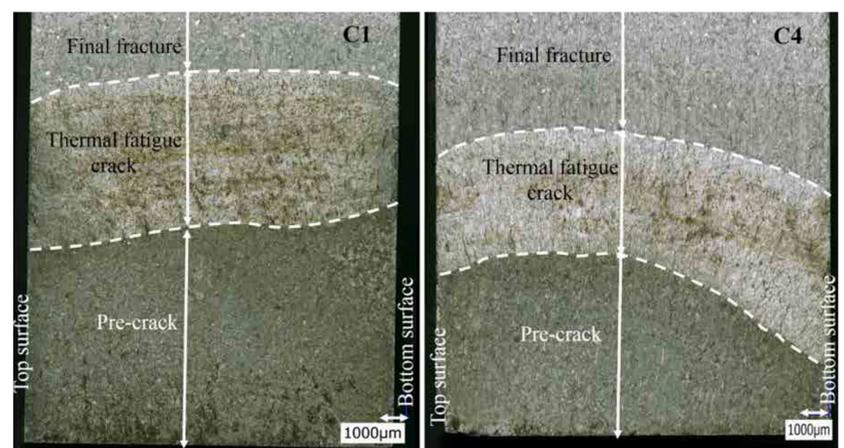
Illustration of fracture surface after a thermal fatigue crack growth test done on the PACIFIC device: from pre-crack to final fracture
